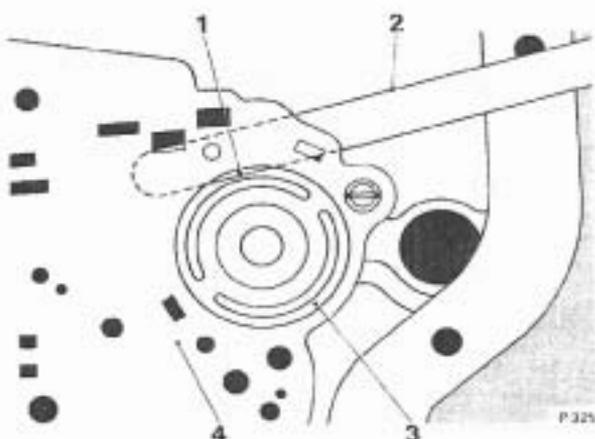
METHOD OF TEMPORARILY HOLDING FRONT SERVO PISTON IN POSITION (TRANSMISSION INSTALLED IN A VEHICLE)
